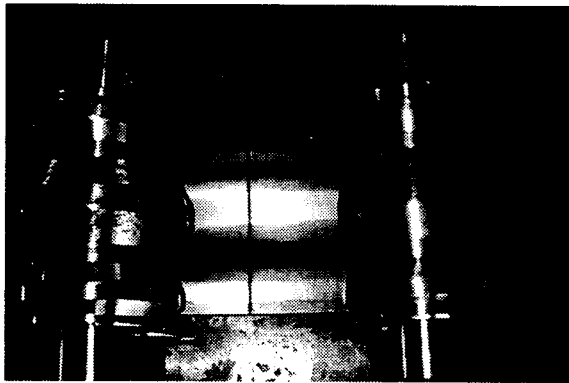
Photograph of roll forming process of laser welded blank.
